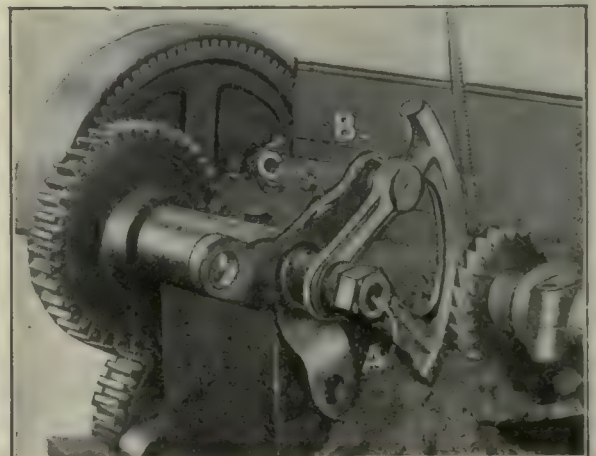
FINISHING OUTSIDE OF ROCKER-ARM GEAR
